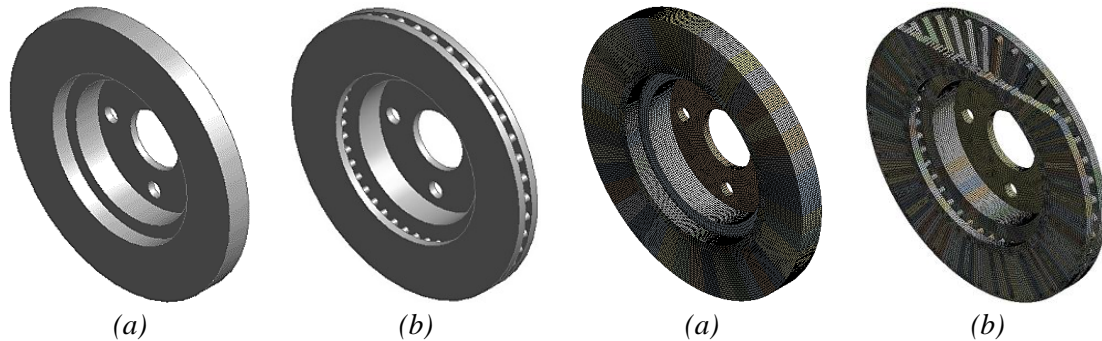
Three dimensional solid-type disc brake (a) and ventilated-type disc brake (b).
